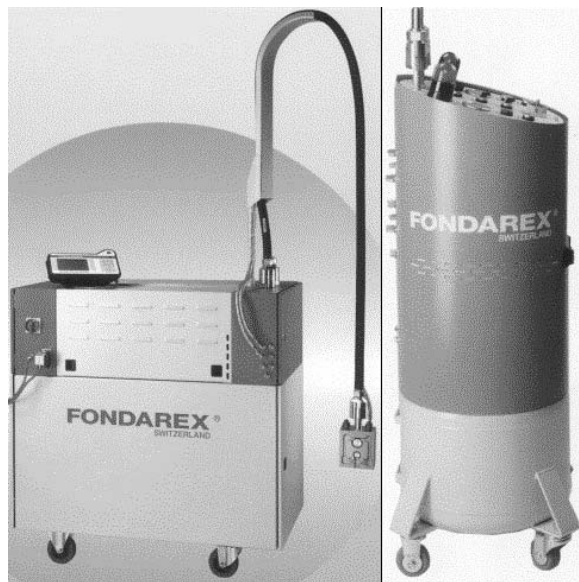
Examples of portable vacuum systems for use in vacuum die casting [40].
